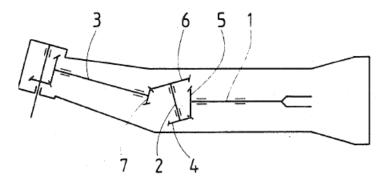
illustrates a gearing with a fixed gear ratio involving six intermeshing bevel gears. The gearing has four non-parallel axes of rotation.
